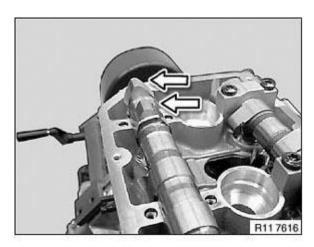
Identifying Cylinder No. 4 Cams Courtesy of BMW OF NORTH AMERICA, INC.
